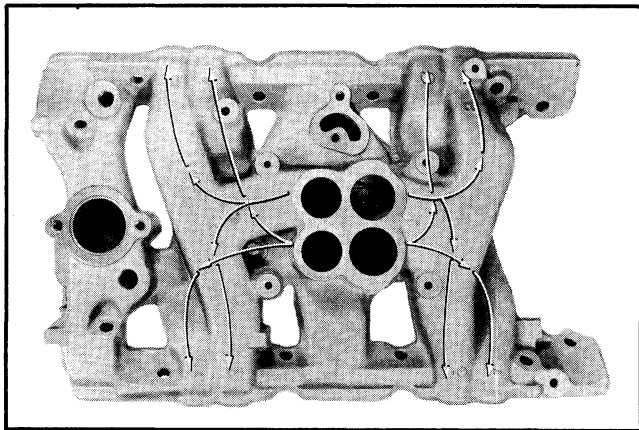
Intake Manifold - Four Barrel Carburetor
